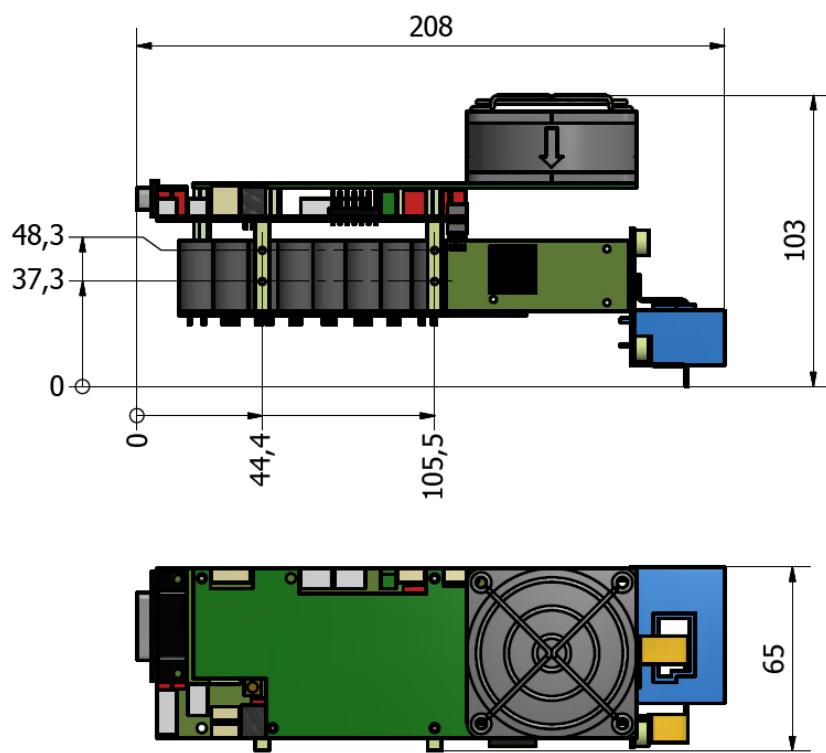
uniLDD series driver with 360A current sensor and 25mm fan installed
